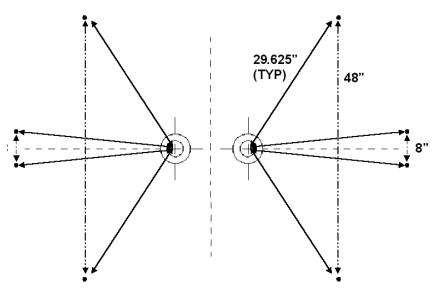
Each yoke mounting hole should be located approximately 29.625" from the center of the bottom bearing housing. The two outer yoke mounting holes should be positioned approximately 48" from each other (24" from the turnstile centerline. The two inner yoke mounting holes should be positioned approximately 8" from each other (4" from the turnstile centerline). Pictured to the right.
